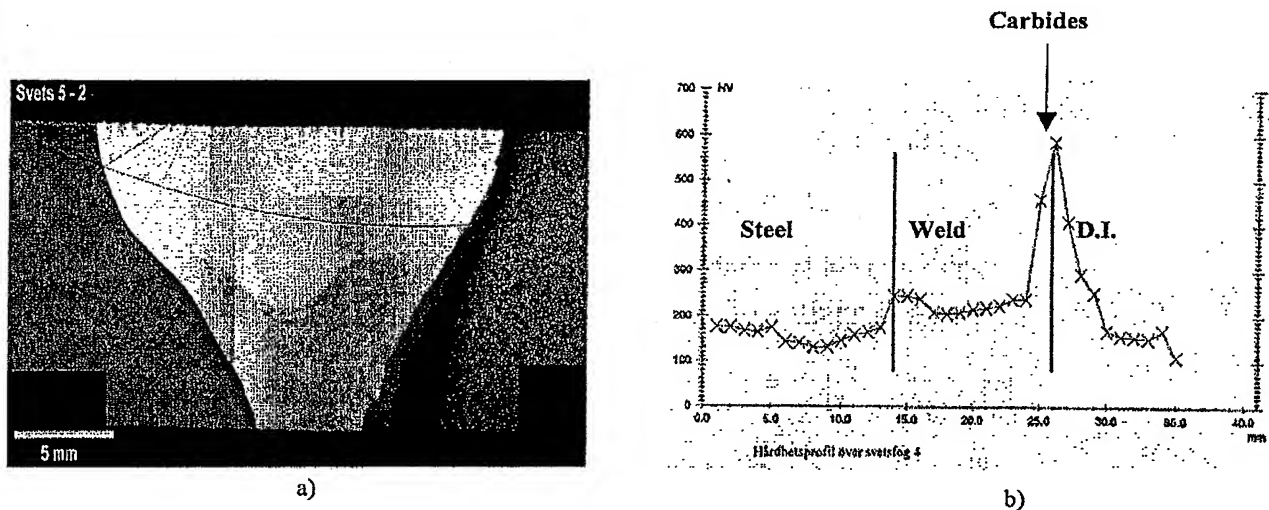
Typical a) macrostructure and b) microhardness (VHN 1000g) profile obtained during the initial steel-to-ferritic ductile iron welding tests.
